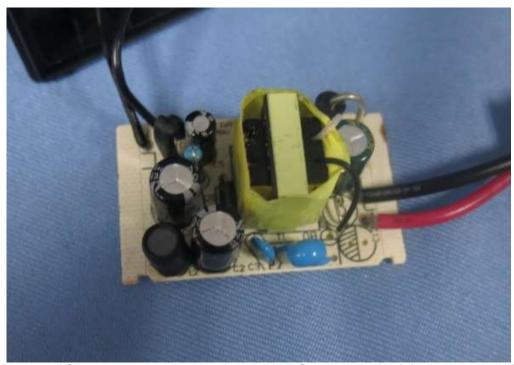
PCB component side view of model RKPO-zzxxxyyyy-D1 (after removed glue)
